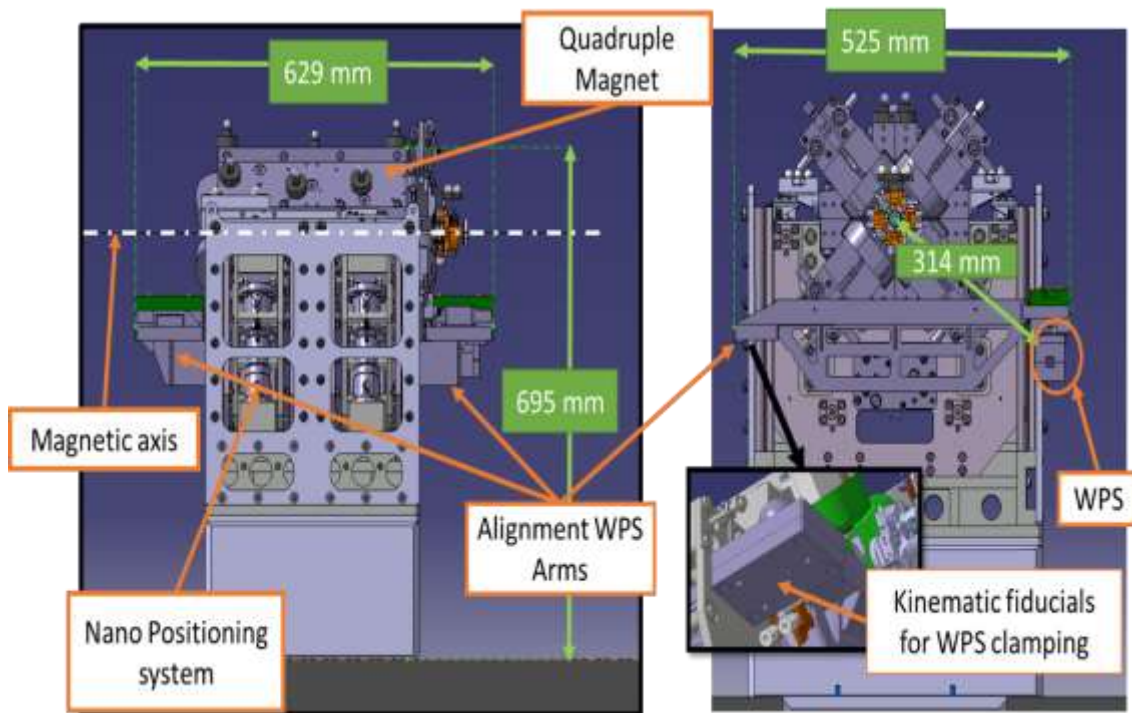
CLIC T1 Module Left: Side view. Right: Front view
